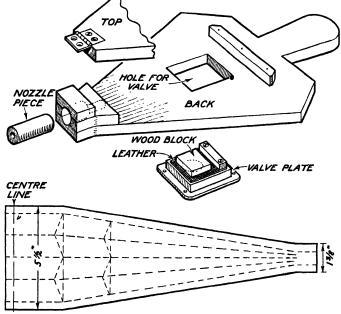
Details of Construction and One-Half of the Leather Sides.
